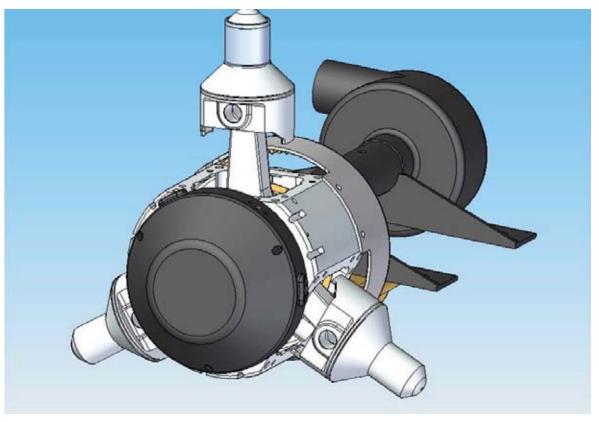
Two diameter pistons, intake and exhaust lines, blower and intake configuration
